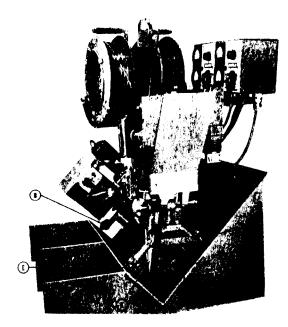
45° Flat Fillet Guide Installed
